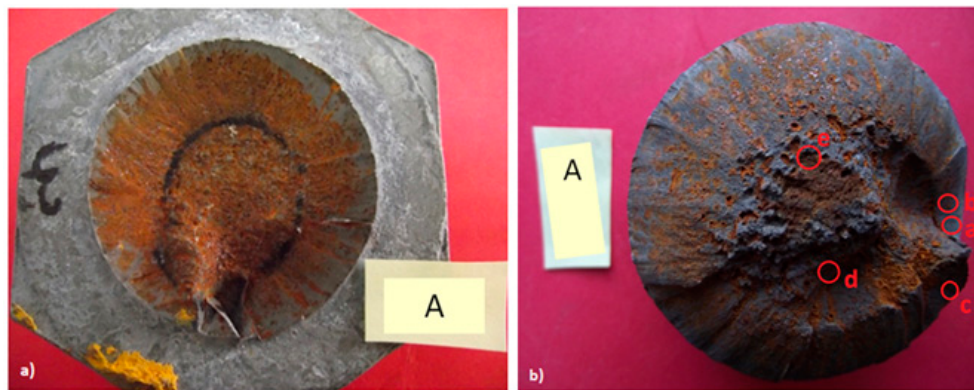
Fracture surfaces at reception of bolt A. (a) Head; (b) shank.
